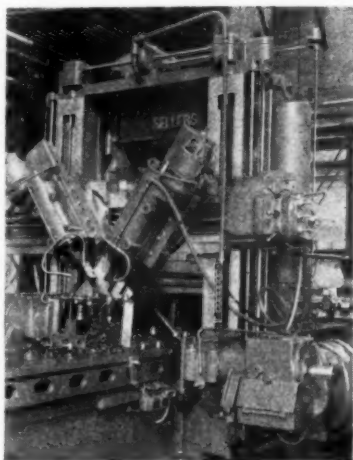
A standard planer with two special units. The heads on the cross rail are so arranged that the tool cuts both on the forward and return strokes. This machine was built to cut slots in the rotors of electric motors and generators.
